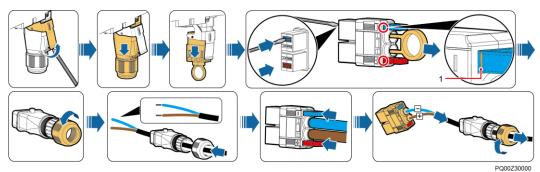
Removing the old quick connector (>6 mm² core diameter)
